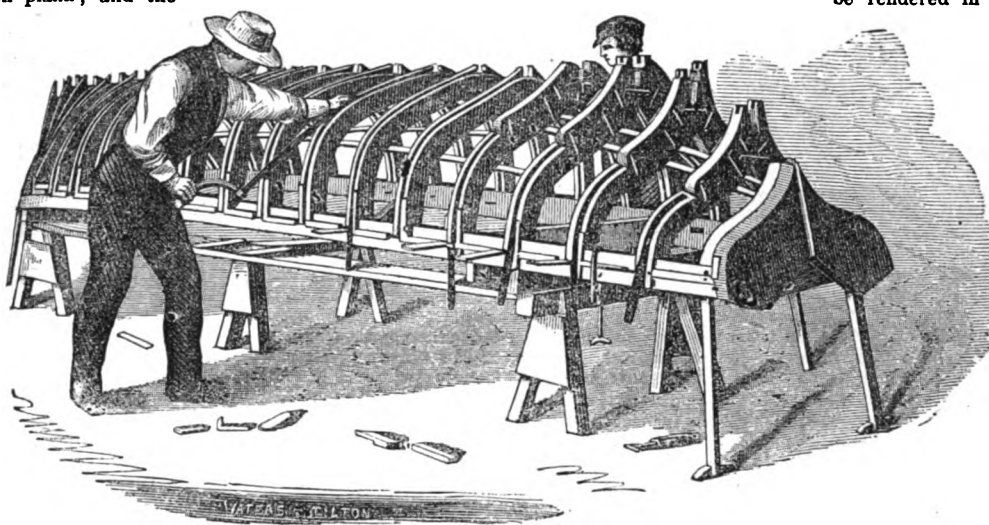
ASSEMBLING FORM, WITH FRAMES ON.
